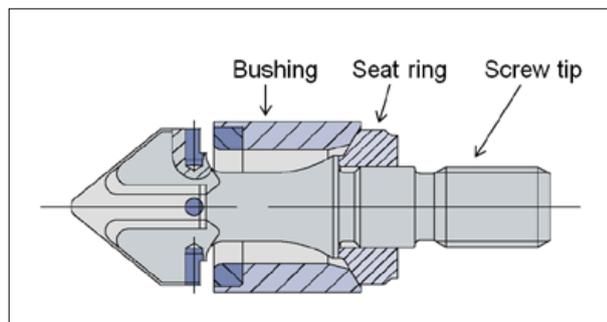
Schematic view of the non-return valve. The non-return valve is made out of a high wear and corrosion resistant steel. The bushing and screw tip is equipped with cemented carbide inserts (Courtesy Arburg)
